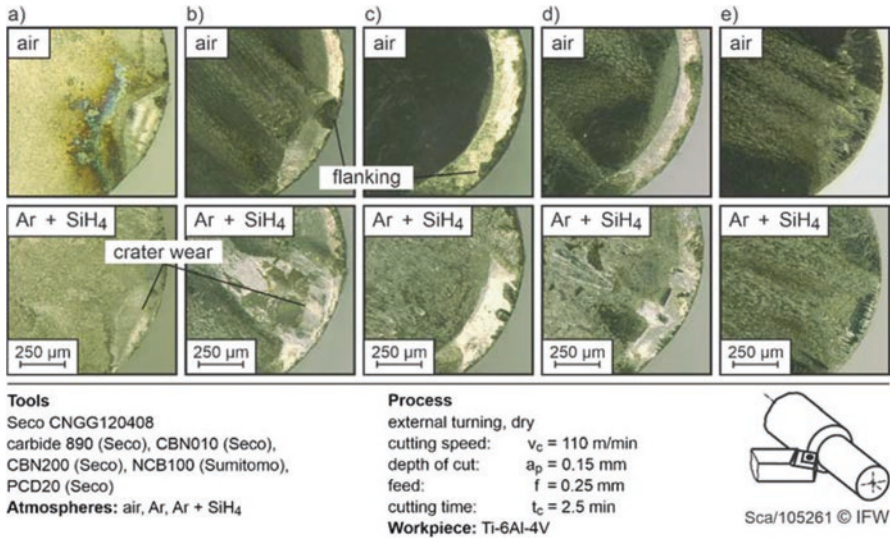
Rake face after a cutting time of 2.5 min for a) cemented carbide b) CBN010 c) CBN200 d) NCB100 and e) PCD20
